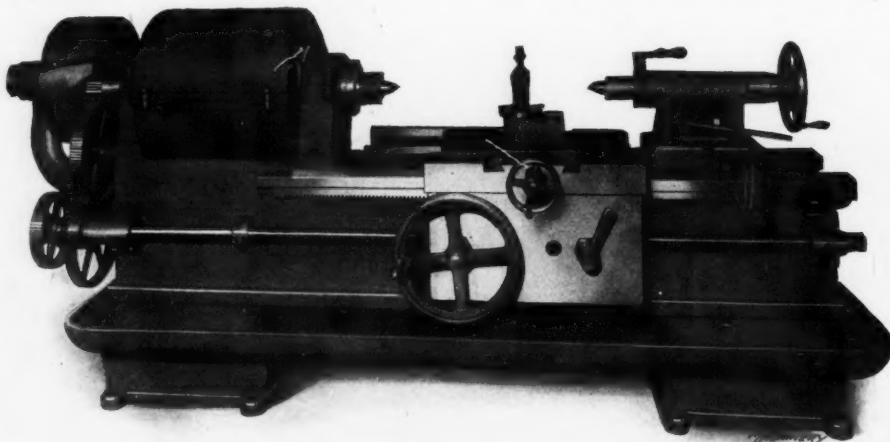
Heavy-duty 22-inch Single-purpose Lathe built by the General Ordnance Co.
